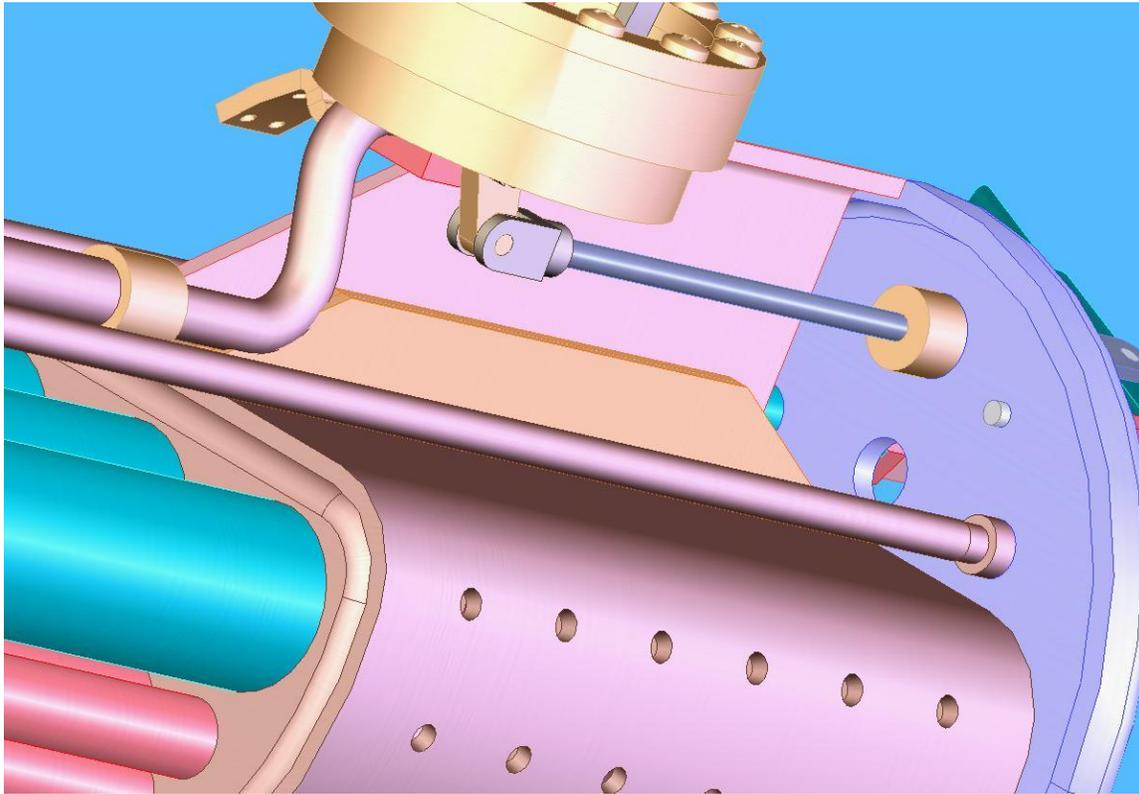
Section View of the Throttle assembly attached to the outer Boiler wrap. Please disregard the holes in the top of the firebox, these will be used for a stress analysis of the boiler and will be taken out afterward.
